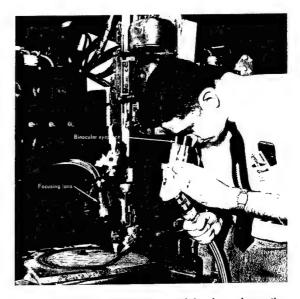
Fiber optic system used in close observation of welding arcs.
